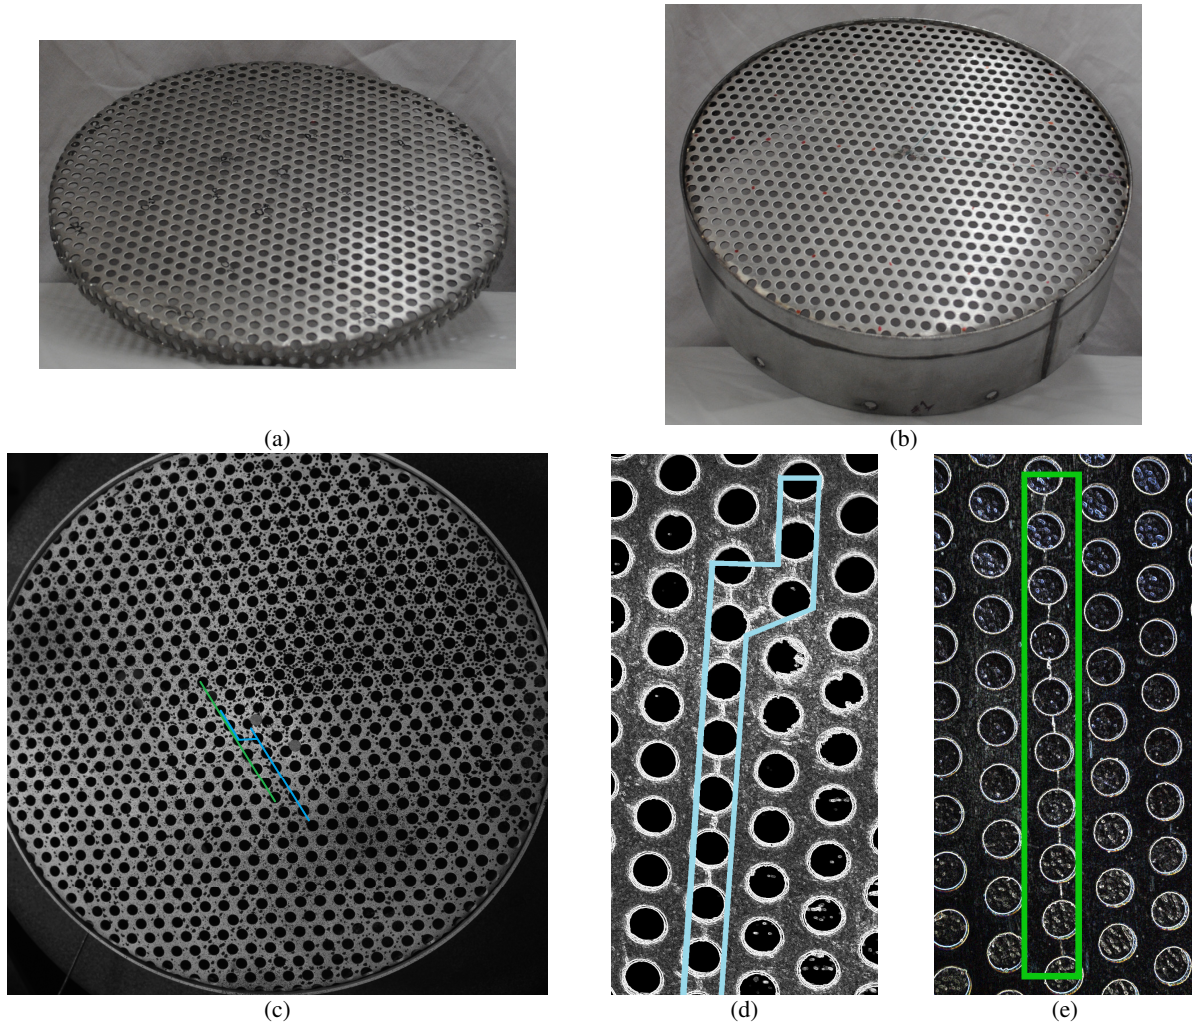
Experimental setup of the perforated plates. a) Perforated plate before welding into test configuration, b) Perforated plate welded into the supporting cylinder, c) Region of failure in both plates, and d & e) Detail of failures in both plates tested. The image has been modified using a threshold adjustment and edge detection algorithm in ImageJ [32] to emphasize the cracked ribs.
